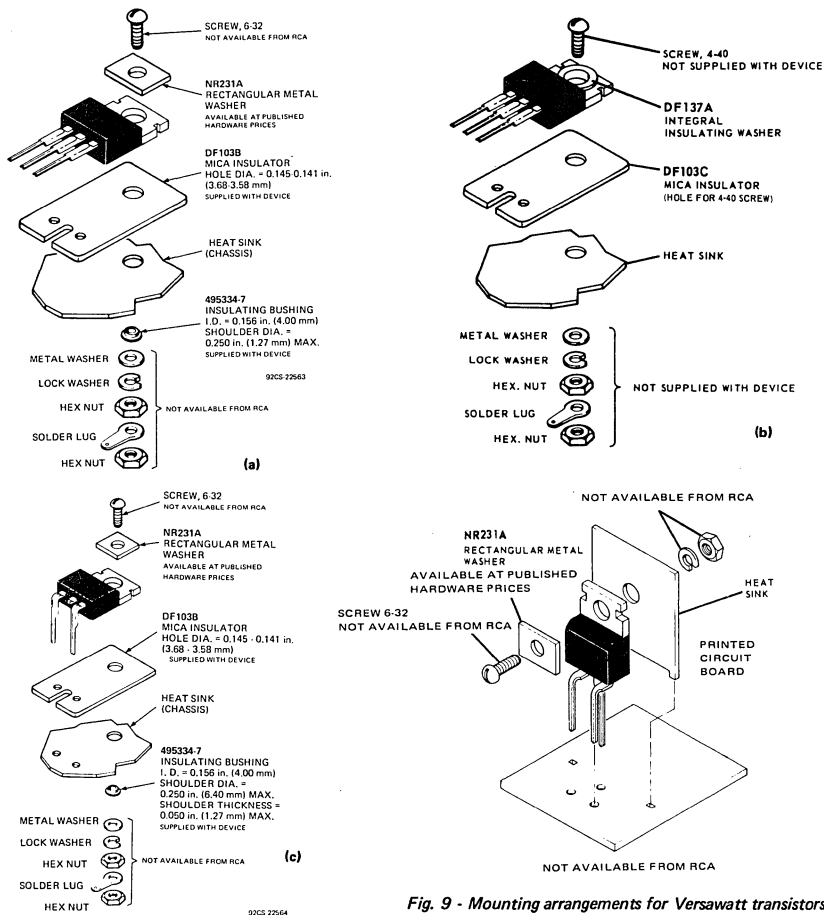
Mounting arrangements for Versawatt transistors: (a) and (b) methods of mounting in-line-lead types; (c) chassis mounting; (d) mounting on printed-circuit boards.
